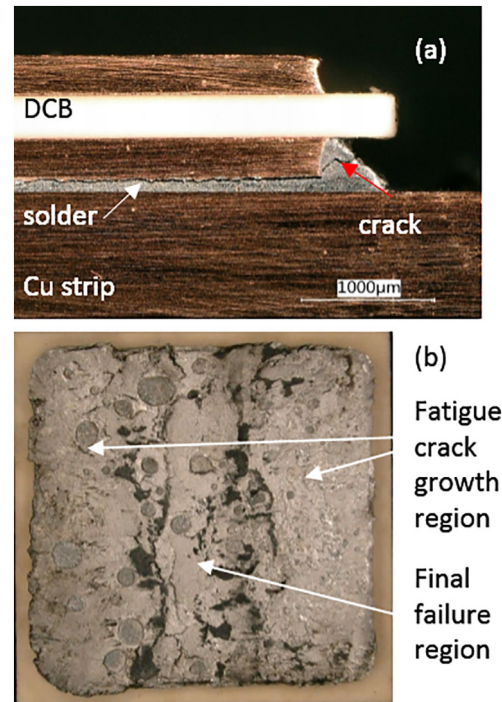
Cross section of a DCB/solder/Cu multilayer showing a fatigue crack within the solder joint a) fracture surface at the DCB side revealing the fatigue crack propagation region at both sides and the final fracture area in the middle of an SbSnAg joint.
